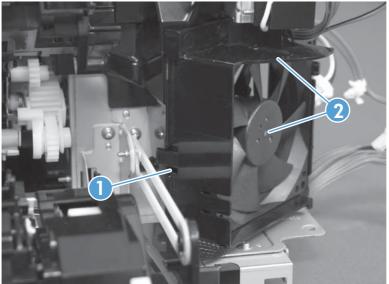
Remove the cassette pickup drive assembly (3 of 10)
